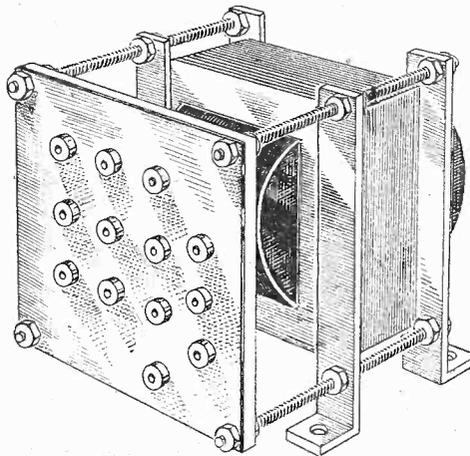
Showing how the clamping strips are made and fixed, and a suggestion for a terminal board.
